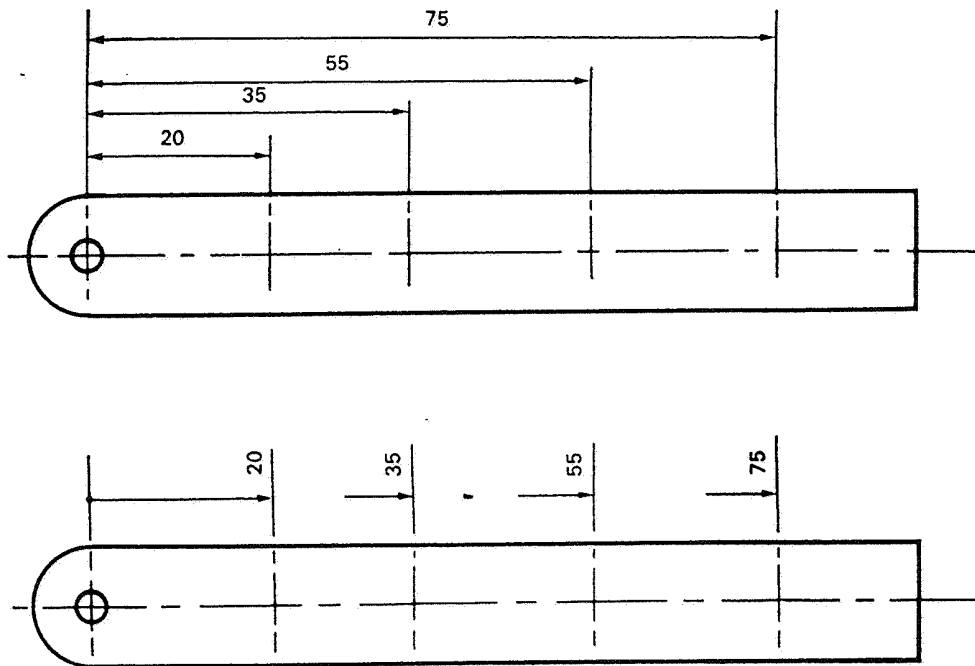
DIMENSIONING FROM A COMMON DATUM
